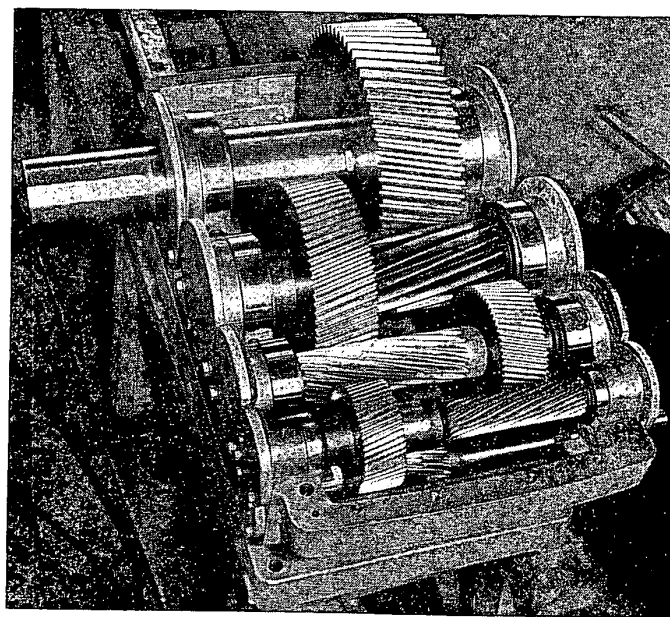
Compact arrangement of a quadruple-reduction gear unit. (Courtesy of Philadelphia Gear Corp.)
